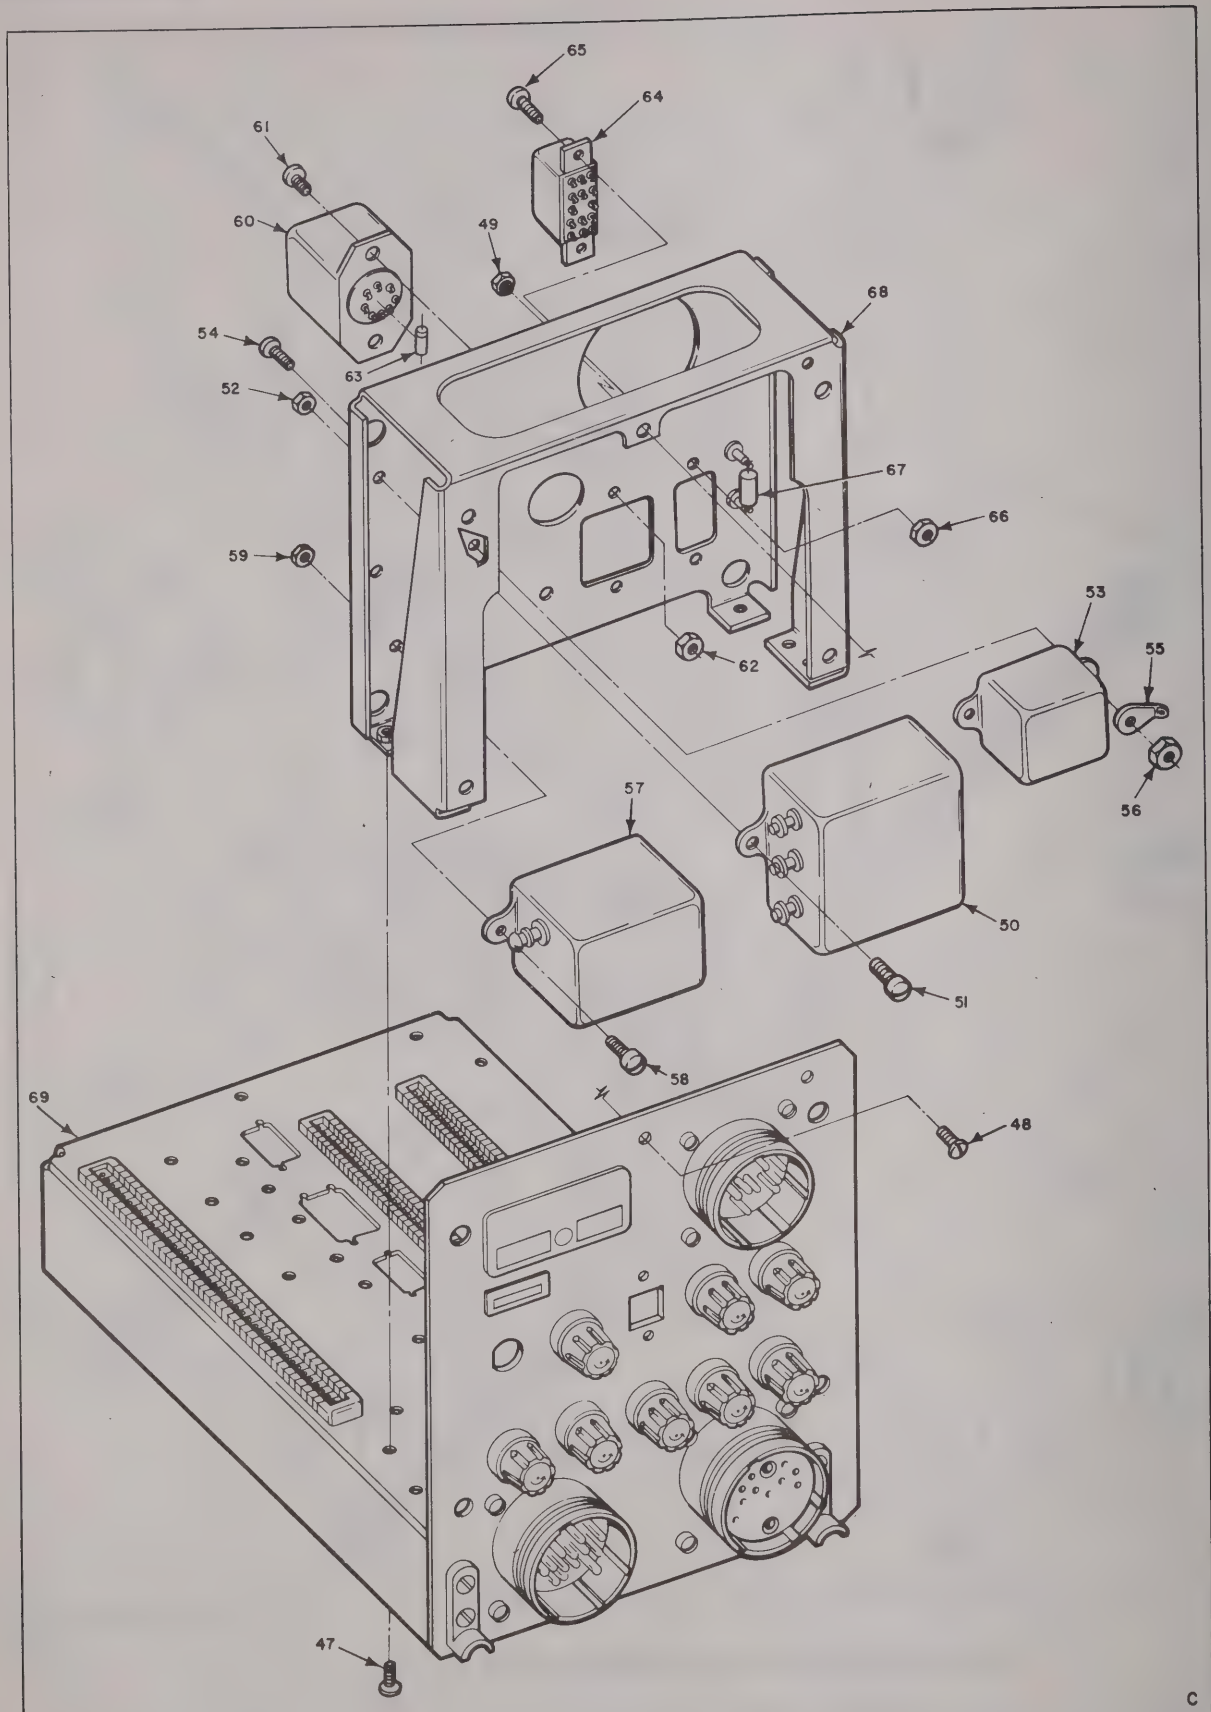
(2). Photo system assembly, exploded view (sheet 2 of 4).
